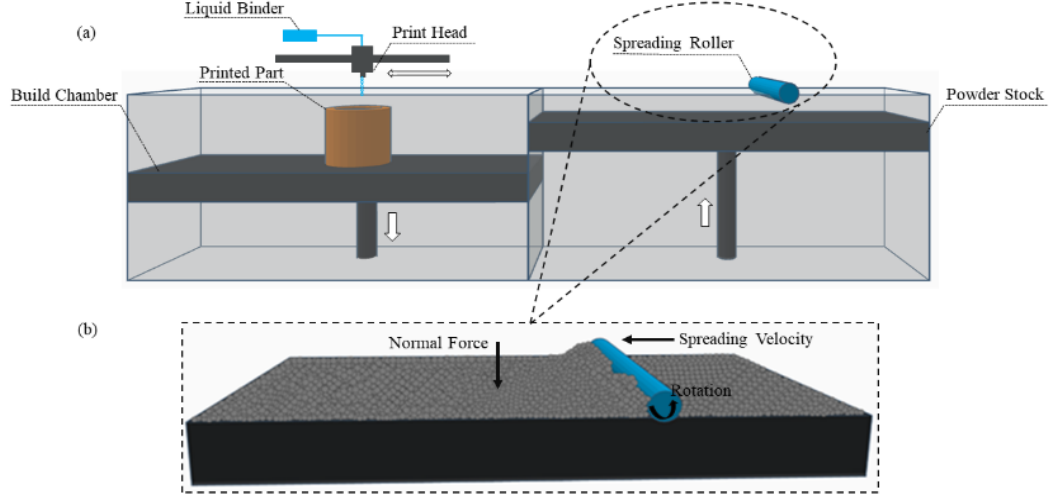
a) Binder jetting additive manufacturing set-up. b) Forces in the powder spreading process.
